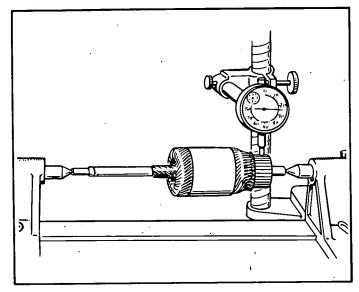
CHECKING COMMUTATOR RUNOUT
